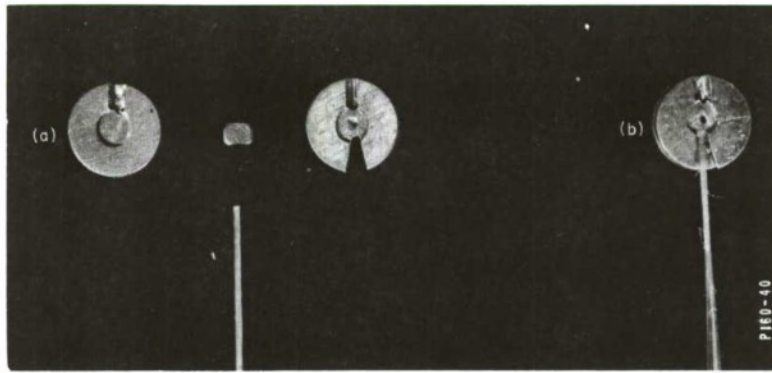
Madel 1 laser element assembly: (a) components before assembly, (b) completed assembly.
